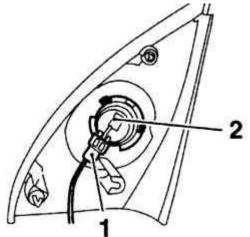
Connector wiring Tweeter: 1 - connector wiring, 2 - speaker
